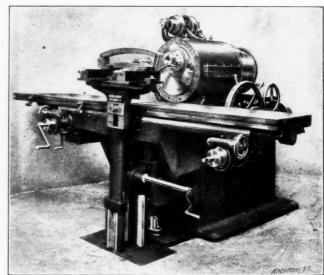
Grinding Links for the Reversing Mechanism of Locomotives
